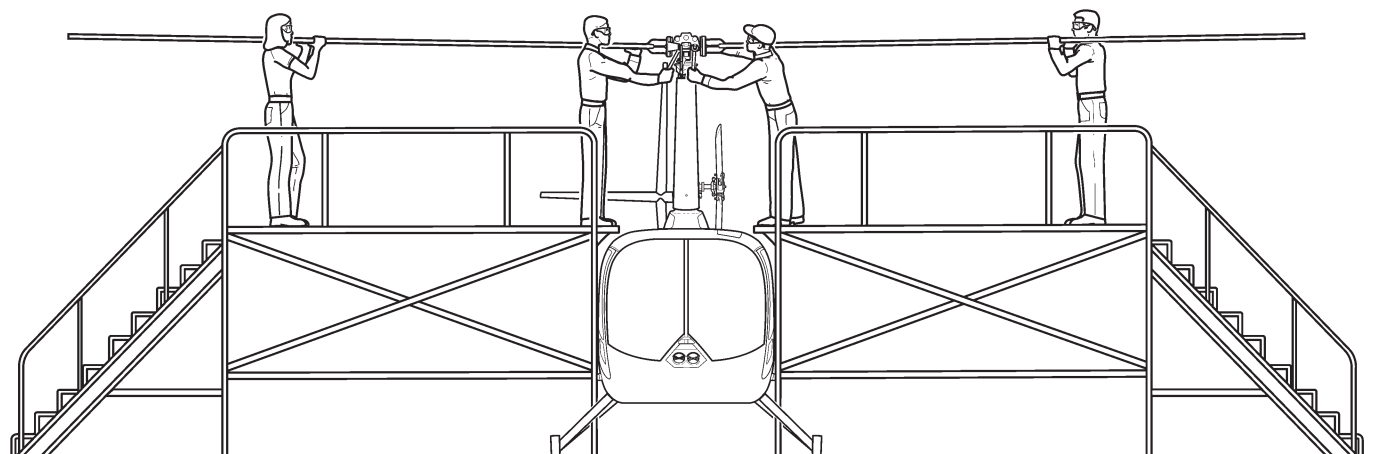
SUPPORTING MAIN ROTOR BLADES DURING BLADE REMOVAL OR INSTALLATION
